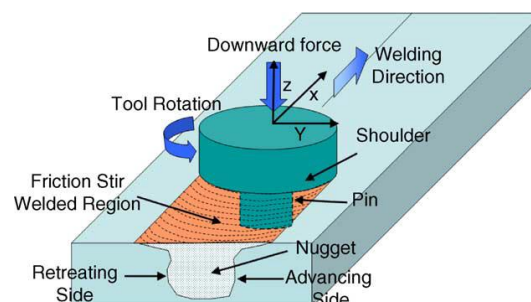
Schematic drawing of FSW (Mishra & Ma, 2005)
